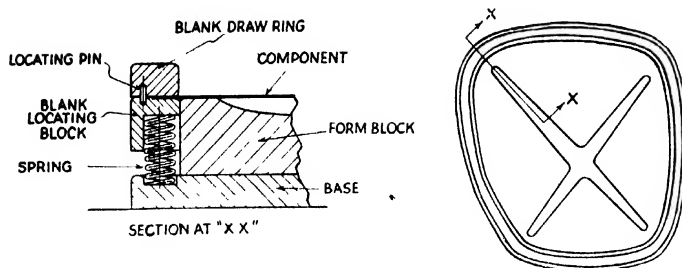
DIAGRAMMATIC ARRANGEMENT OF AN ALTERNATIVE METHOD OF FORMING FLANGES IN THE RUBBER DIE PRESS
